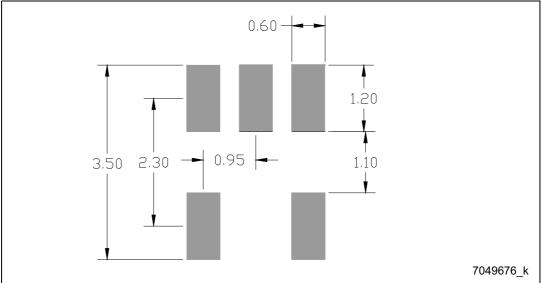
SOT23-5L recommended footprint (dimensions in mm)
